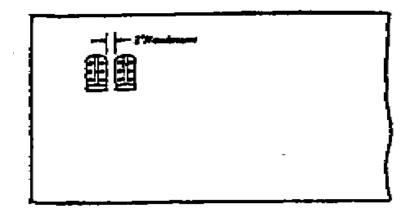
Spacing of Supporting Lugs in Pairs on Horizontal. Return Tubular Boilers
